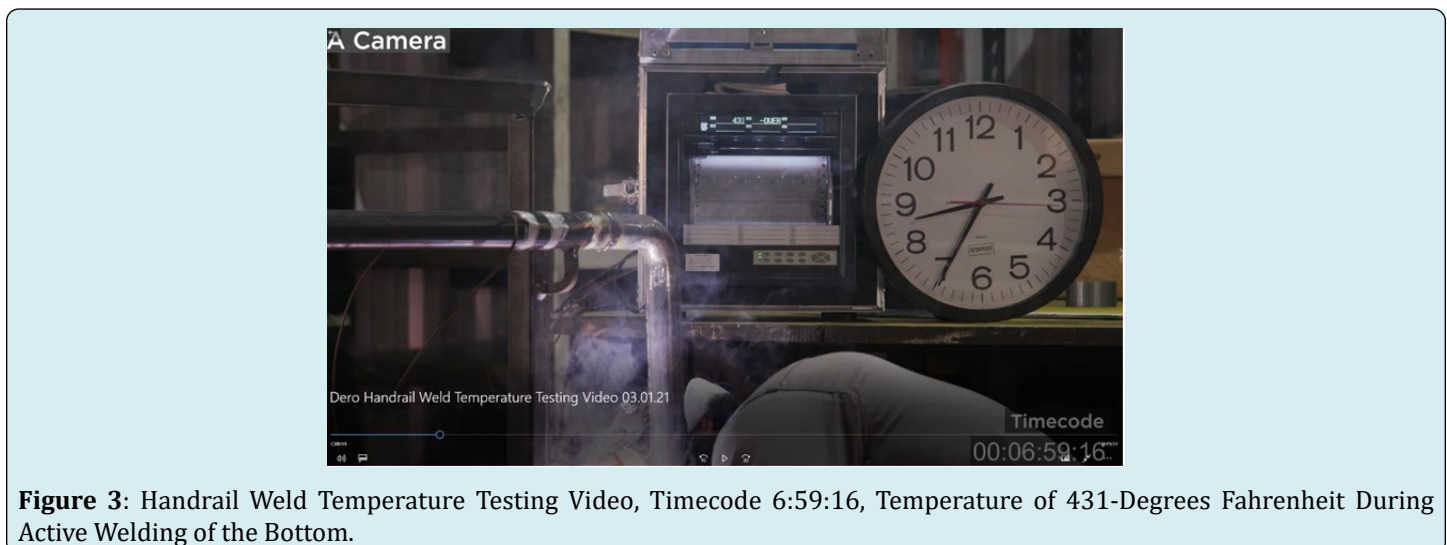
Handrail Weld Temperature Testing Video, Timecode 6:59:16, Temperature of 431-Degrees Fahrenheit During Active Welding of the Bottom.
